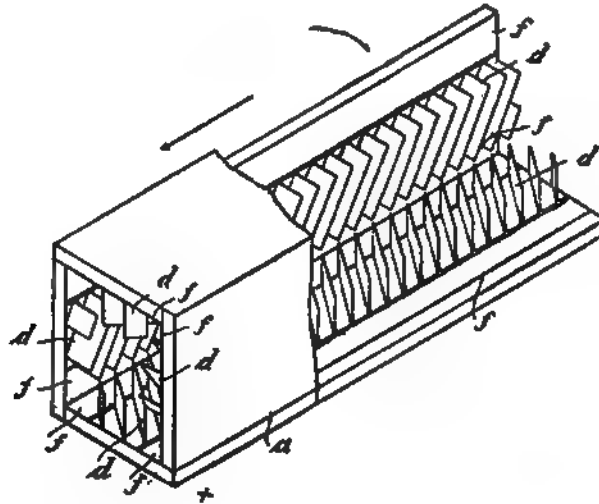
Perspective View and Part Section of Sues Tube Conveyor.
